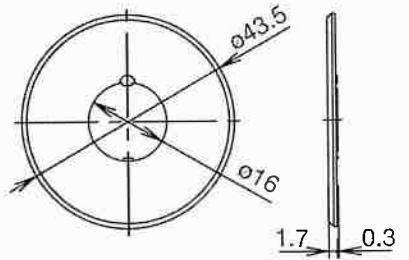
Typical E-Stop button with small button ISO 13850 Dimensions
